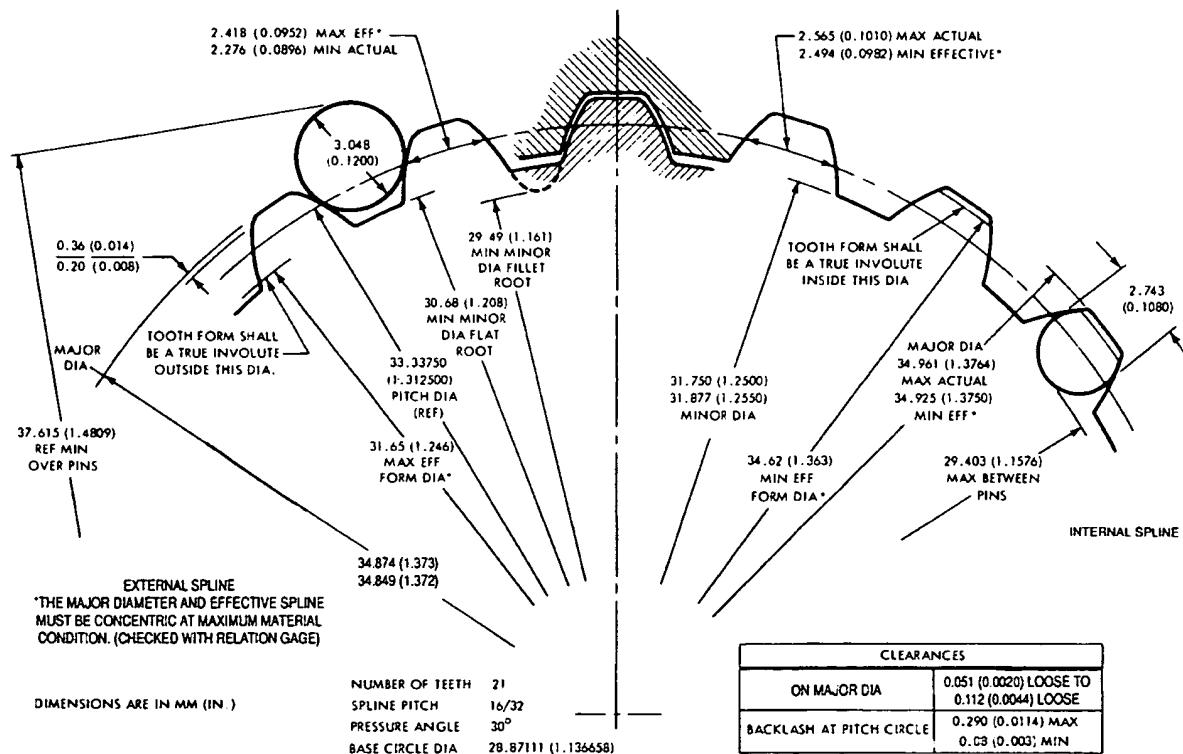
Type 2 power take-off 1000 r/min—35 mm (1 3/8 in.) diameter—involute spline dimensions
